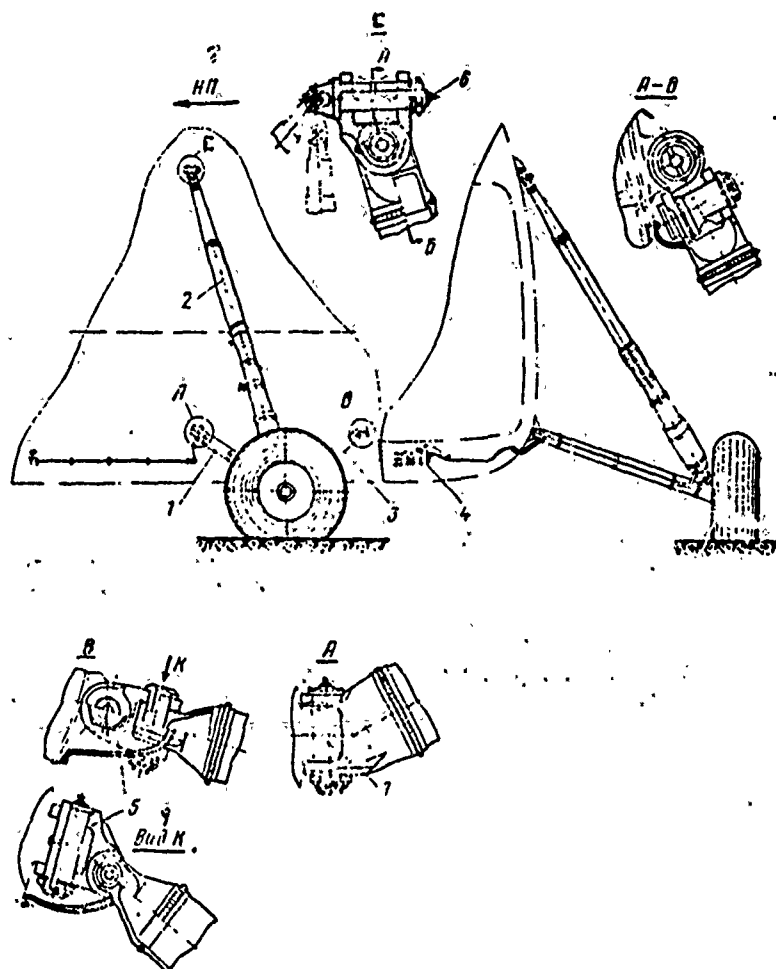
Fastening of Main Gear Leg to the Fuselage:
